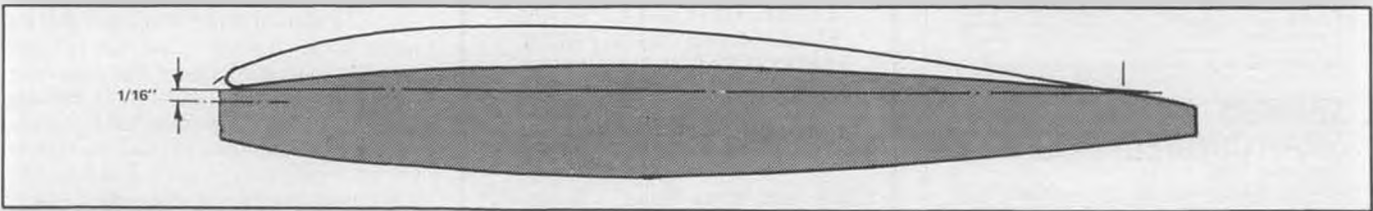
Undercambered sections using E.S. Pattern. To produce undercambered section, mark the datum line and place pins at desired leading and trailing edge points. Take upper surface template (say 6%) place notch around pin and bring template to touch trailing edge pin. Next, bias leading edge pin by moving it down about 1/16" then repeat above procedure using thinner template (2%). Fair in leading edge with suitable curve.
